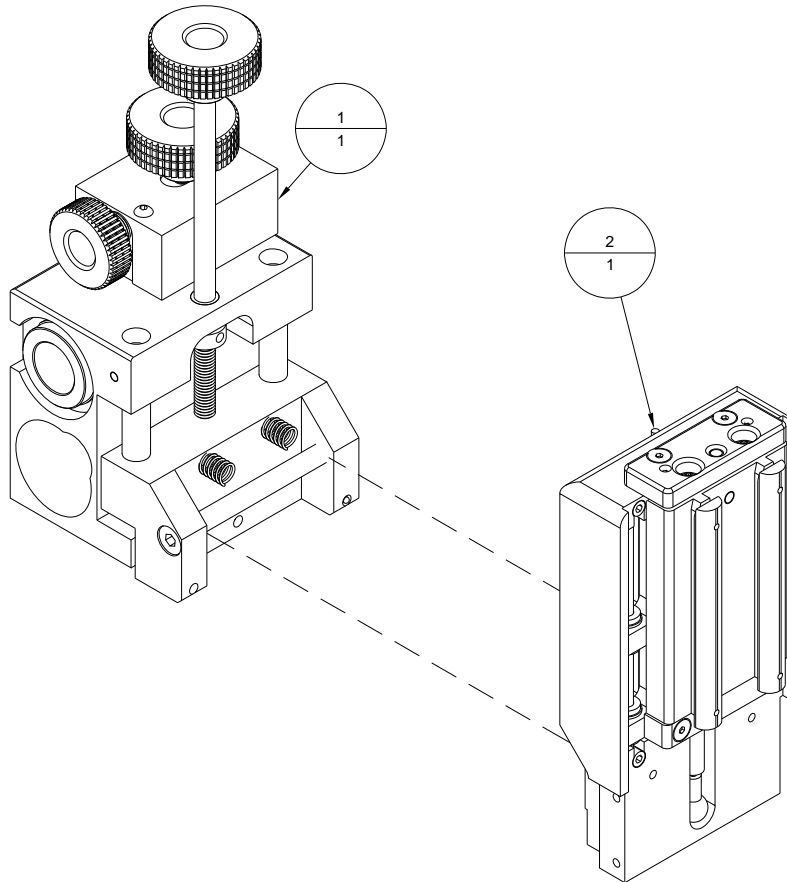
BK80M-4 - Mount, Printhead 2250/3250, BK80
